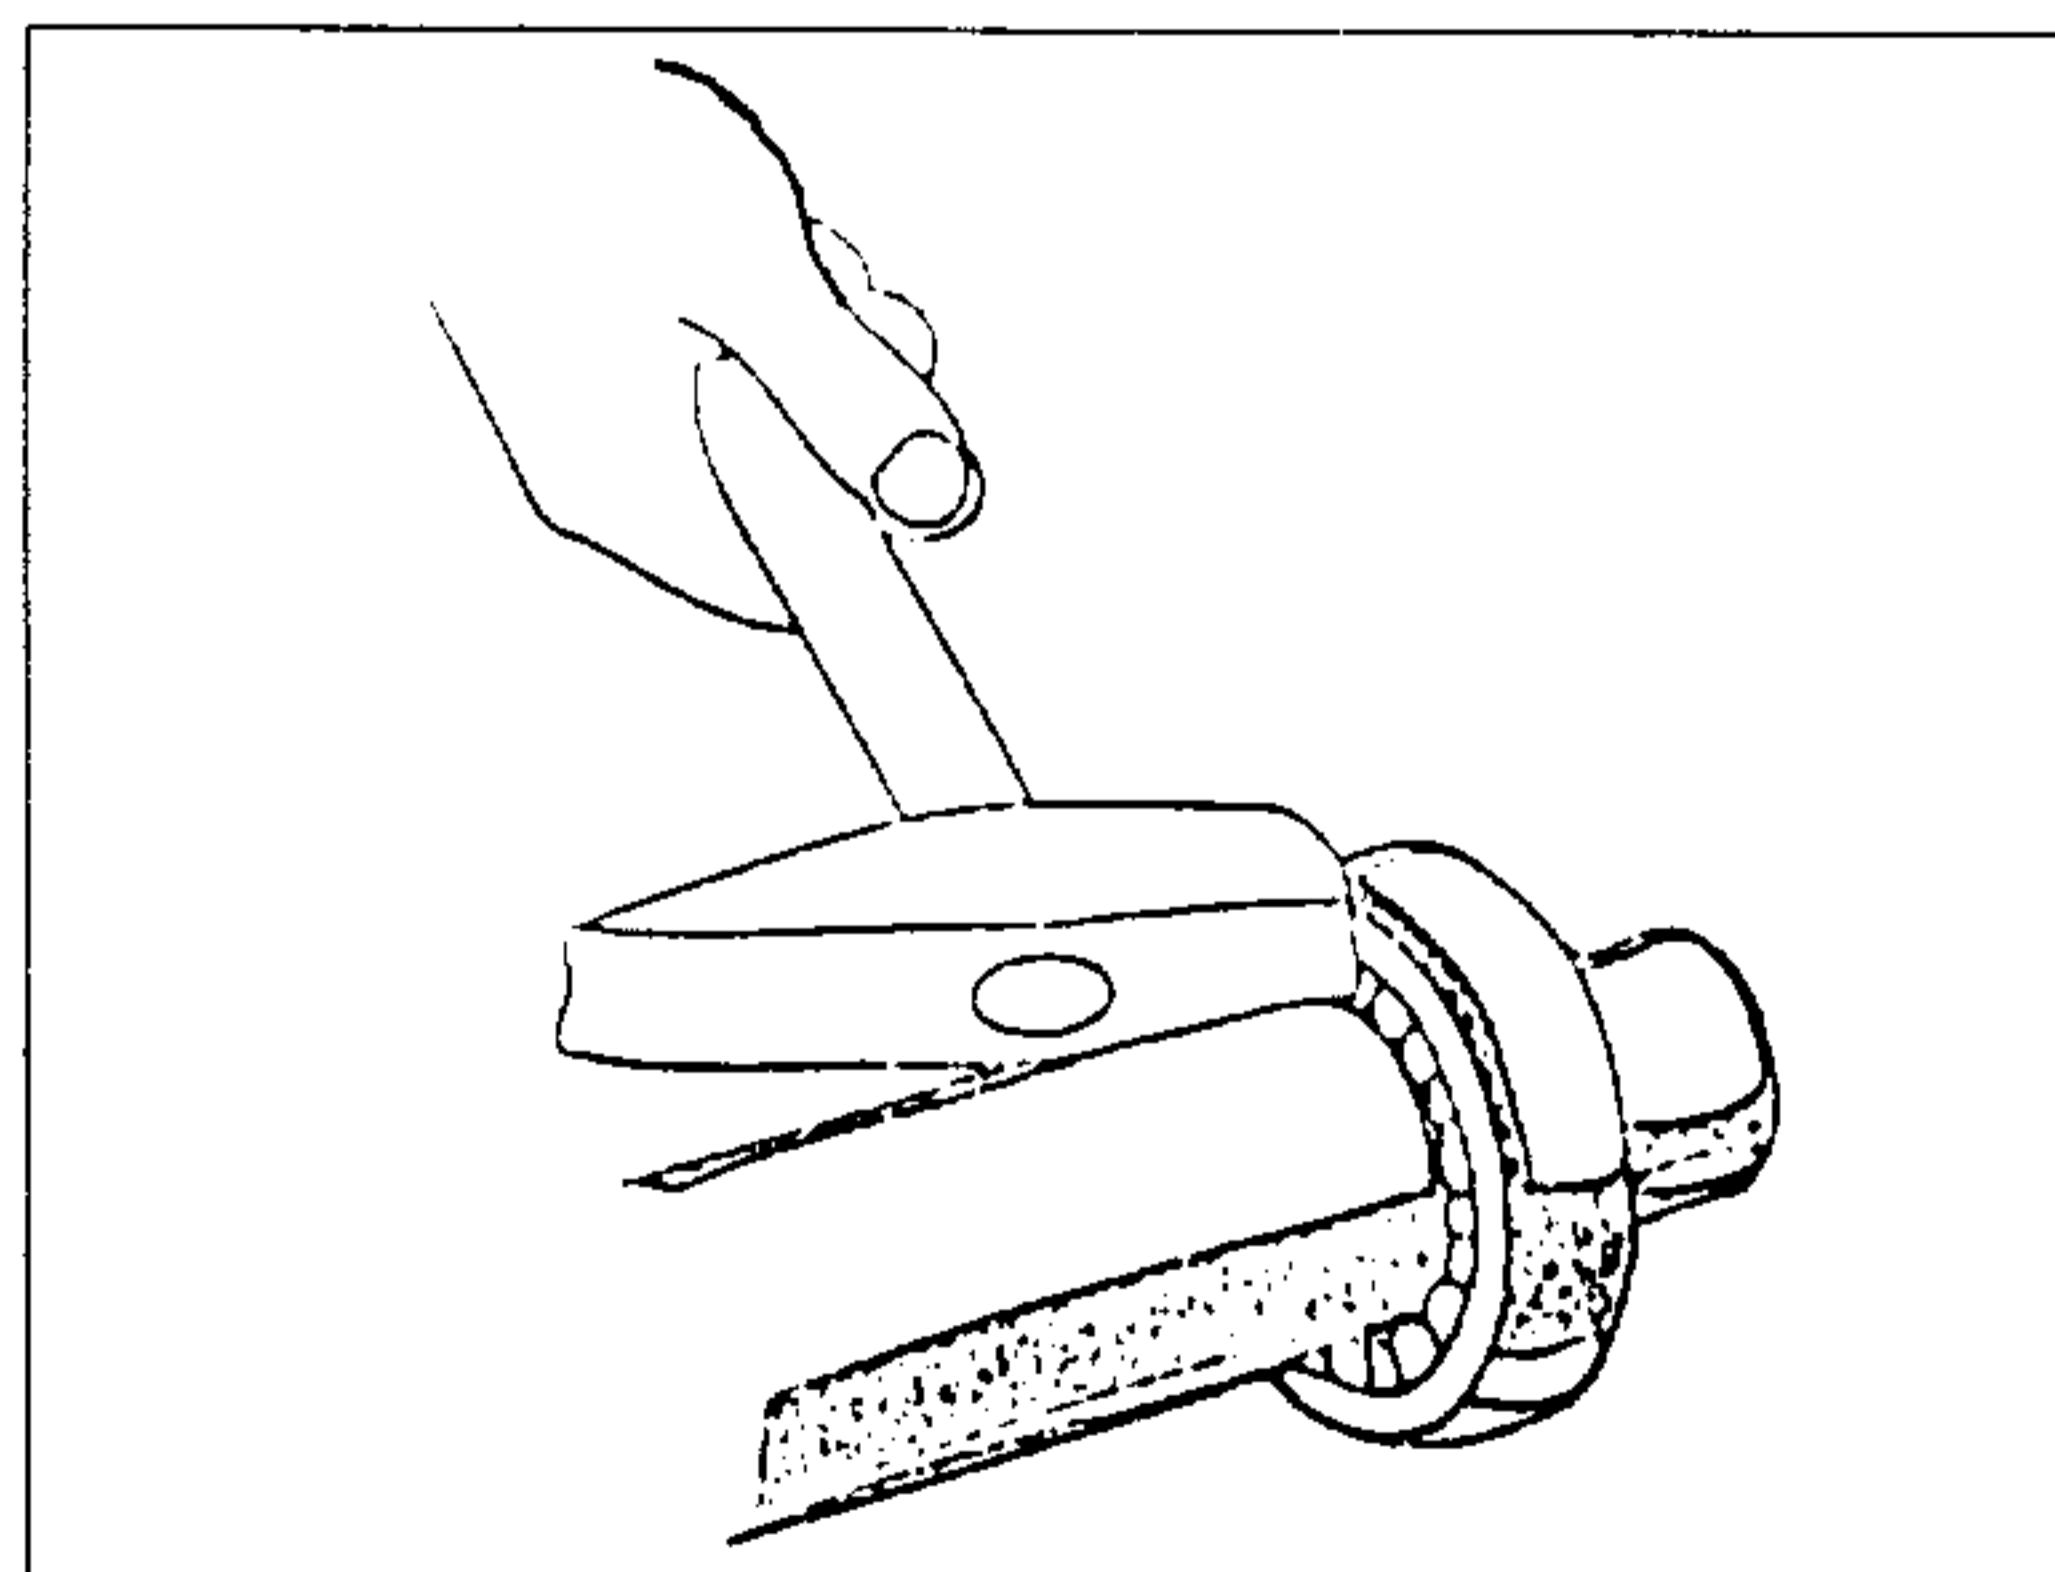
The way Not To Do It. (Hammering directly on a bearing ring can cause cracks which lead to bearing failure)
